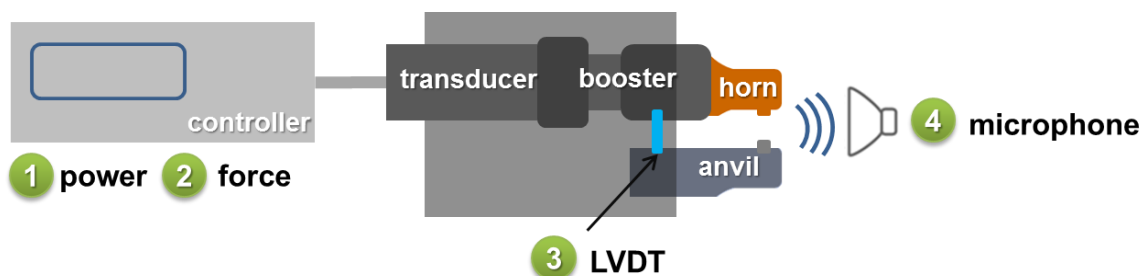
Sensors and their positions in the ultrasonic metal welding machine
